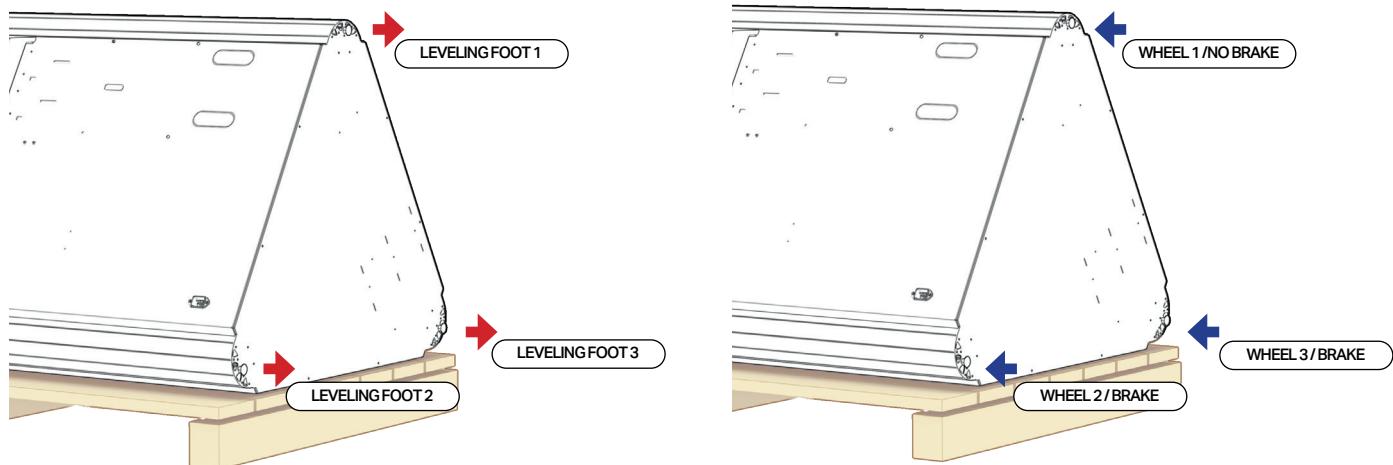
Removing the rubber pads and assembling the optional wheels
